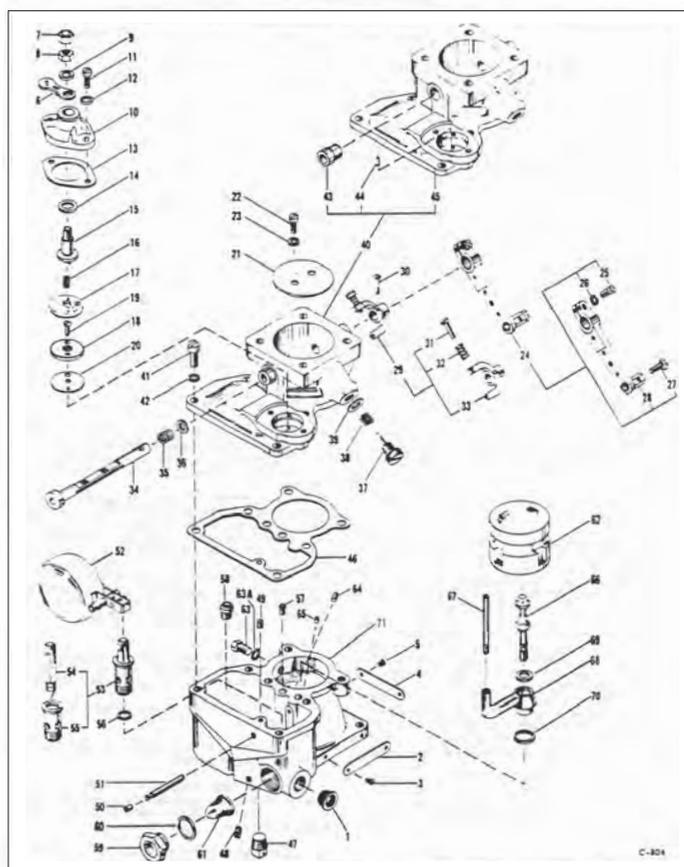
Exploded View of Stromberg NA-33A1 Float Carburettor
